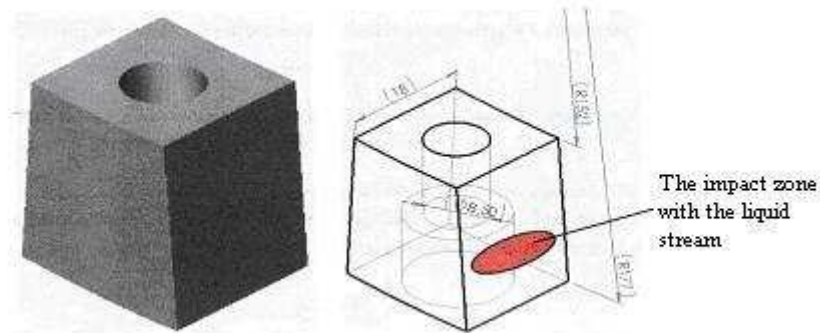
The form of the specimens distinguishing the surface on which places the impact.
